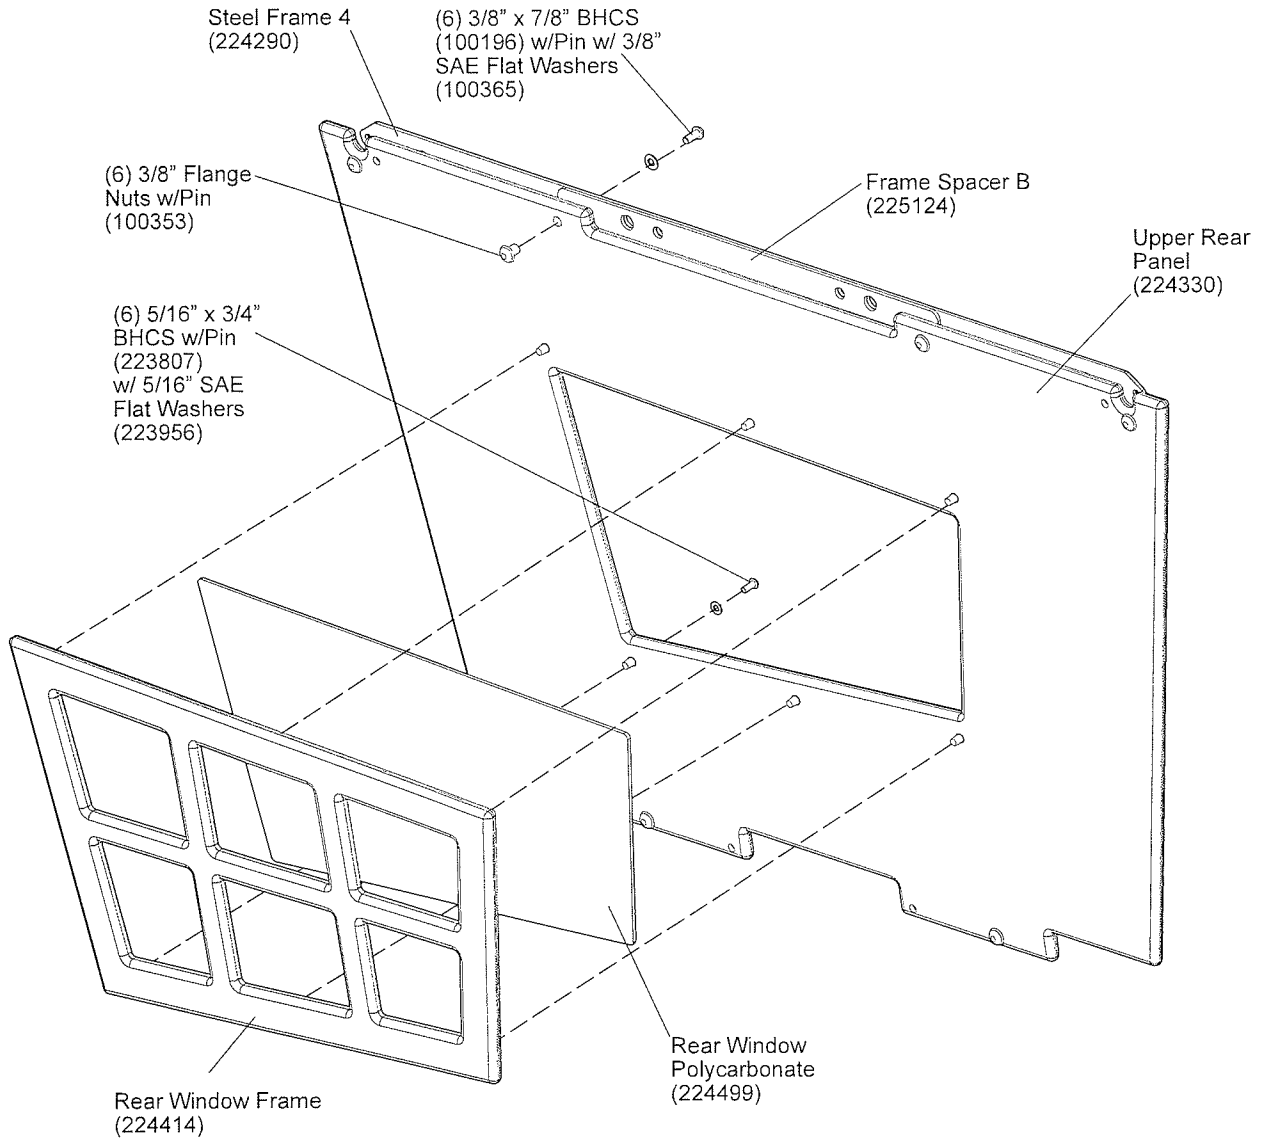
DETAIL PANEL TO FRAME ATTACHMENT (TYPICAL)
